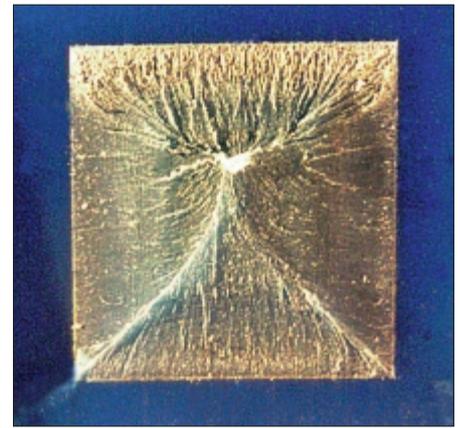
Fracture surface of a FNCT specimen taken from a PE 100 pipe
